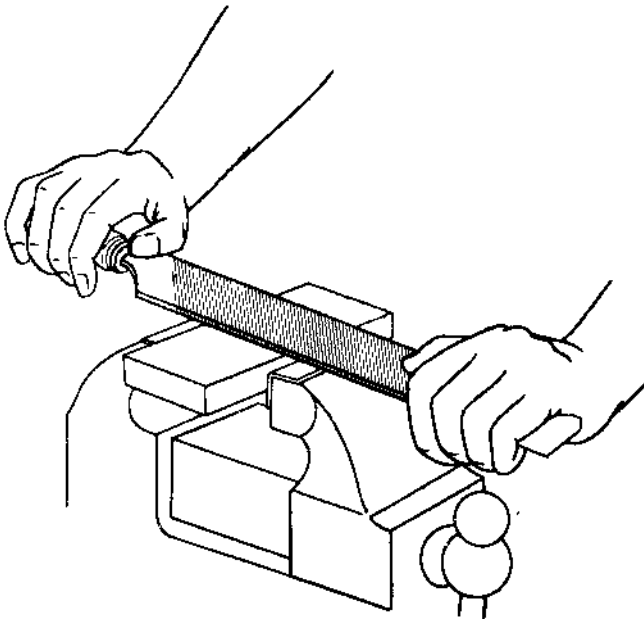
Drawfiling for producing a smooth surface. (Courtesy Disston, Inc.)
